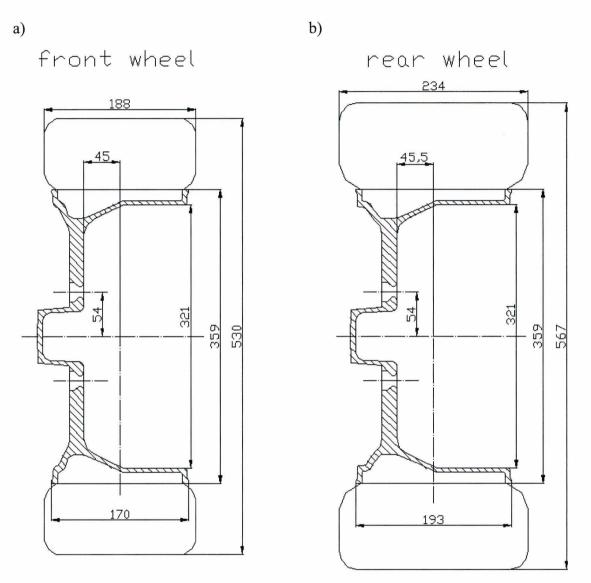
Offset wheels a) section front wheel b) section rear wheel
